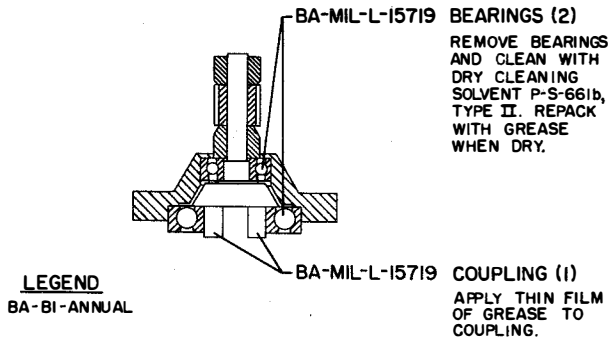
R-f Tuner, Cross Section of Drive Motor Shaft Extension, Lubrication
